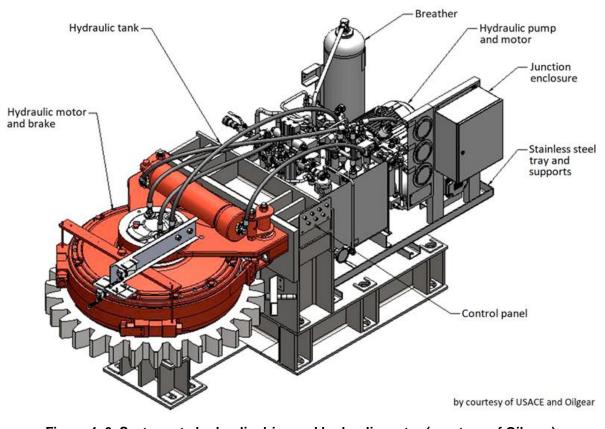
Sector gate hydraulic drive and hydraulic motor (courtesy of Oilgear)
